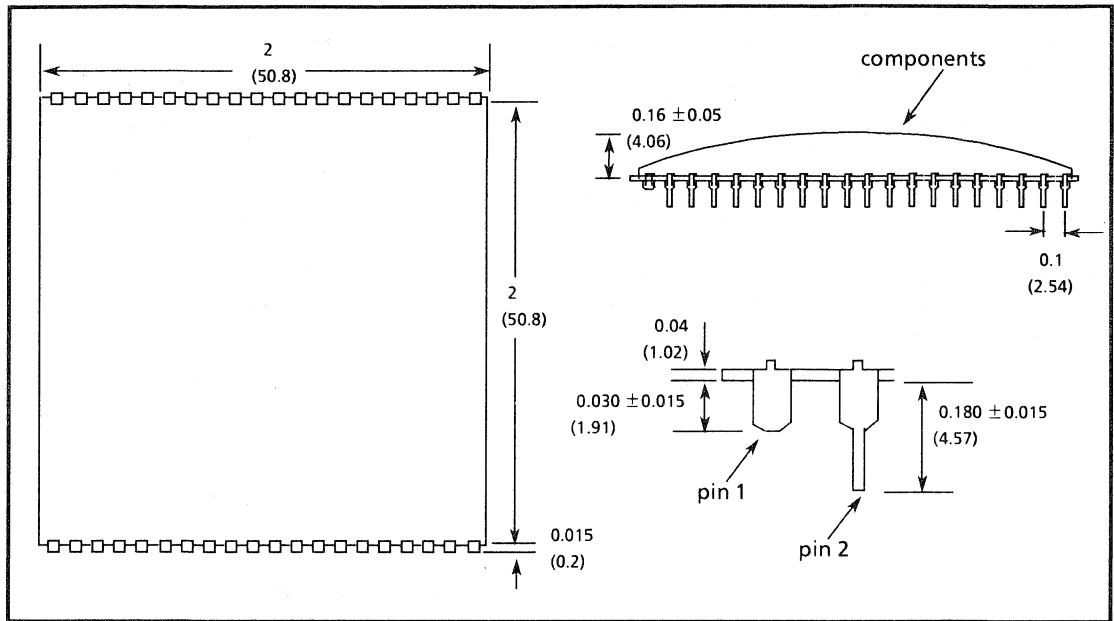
Physical Dimensions of 40 Pin Dual In Line Hybrid Package
